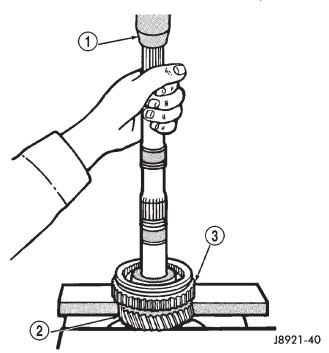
Remove Second Gear, Reverse Gear, And 1–2 Synchronizer
